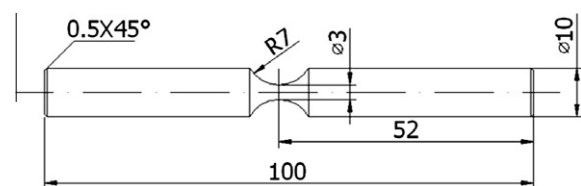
Schematic drawing of an hourglass-shape specimen for rotary bending fatigue test (dimensions in mm).
